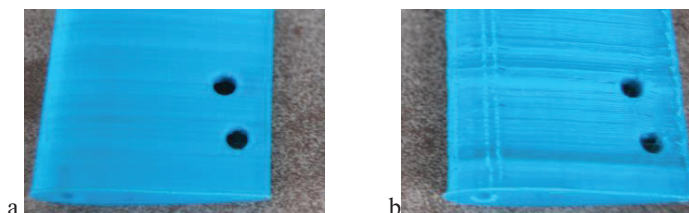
Blade printed with a layer height of: (a) 0.2 mm; (b) 0.4 mm.
